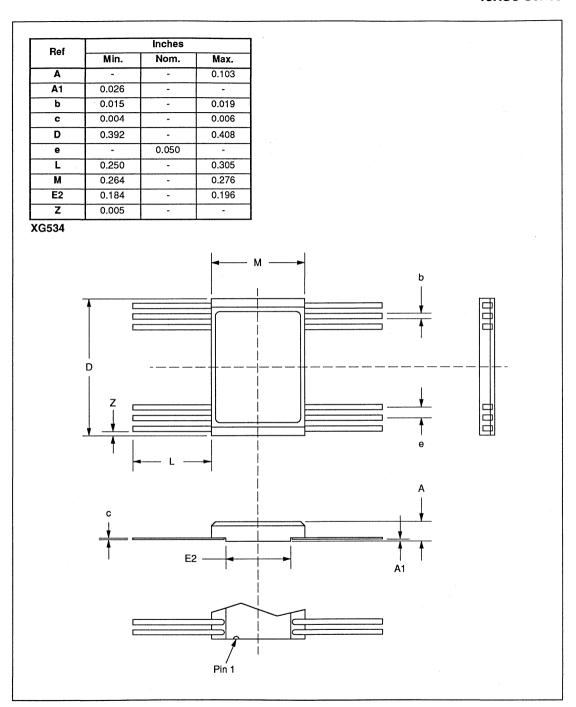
16-Lead Bottom Braize Flatpack (Solder Seal) - Package Style F
